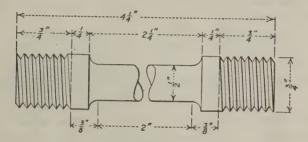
Standard Form of Test Specimen Required for all Tension Tests of Steel Casting Material
